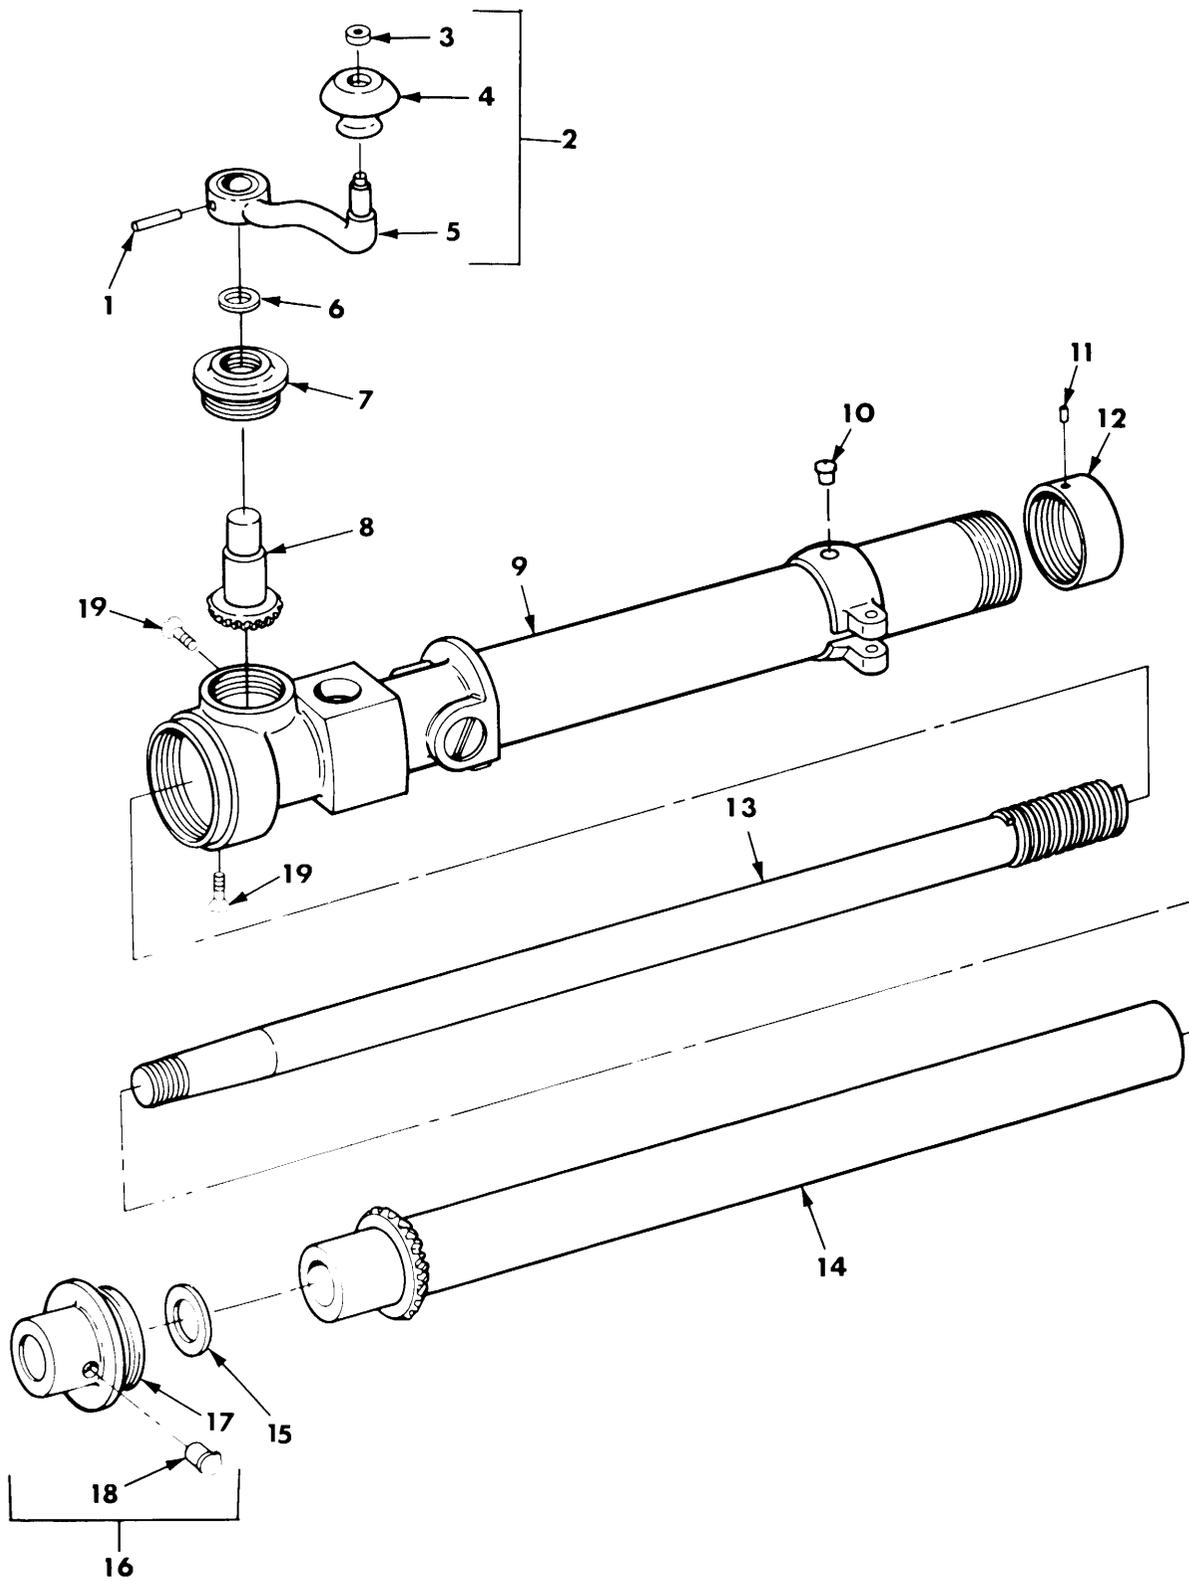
Mortar Elevation Assembly 10932755, Cover 7237799, and Elevation Crank Assembly 10918087.
